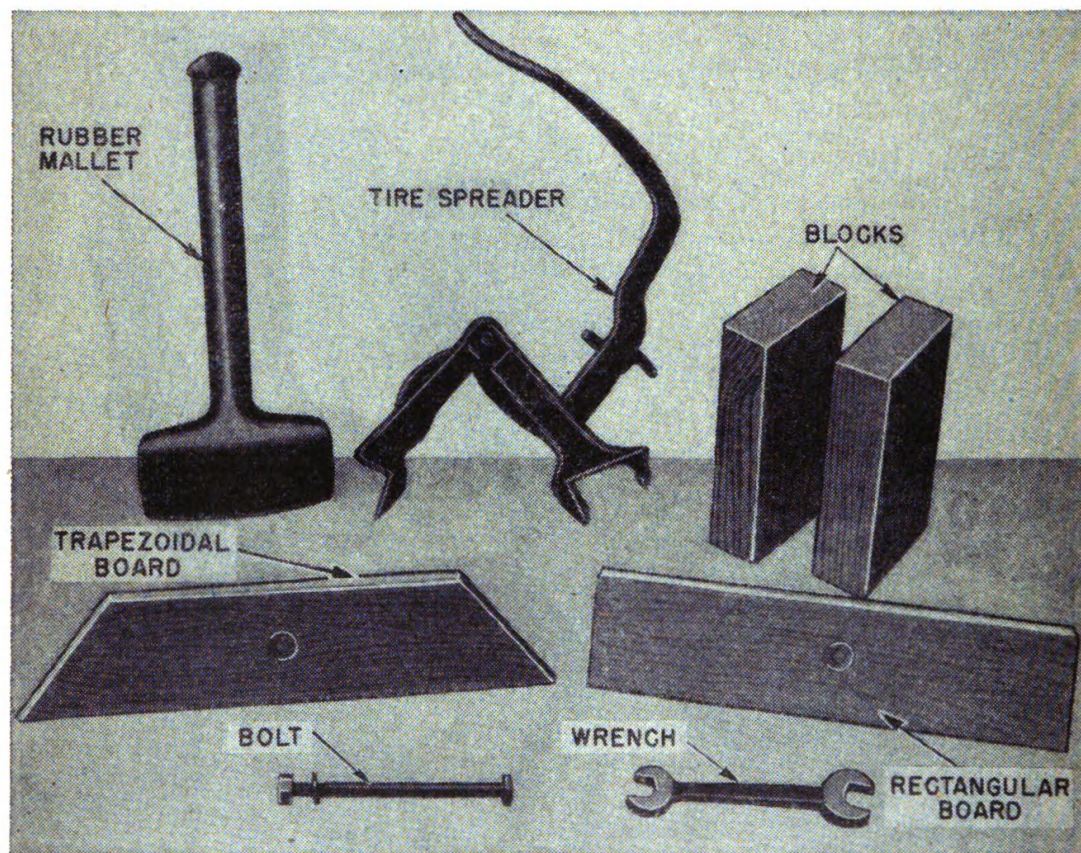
Equipment for inserting bullet-sealing tubes in conventional tires.
